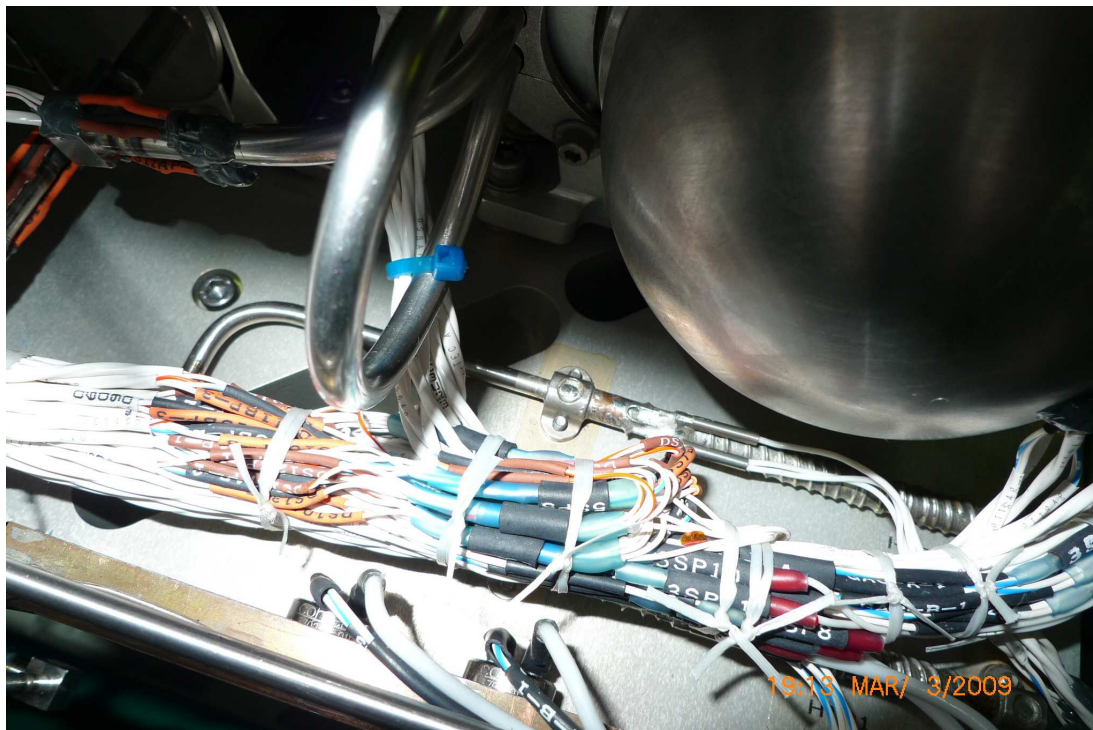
FM-Primary picture of the final flight assembly Primary box
